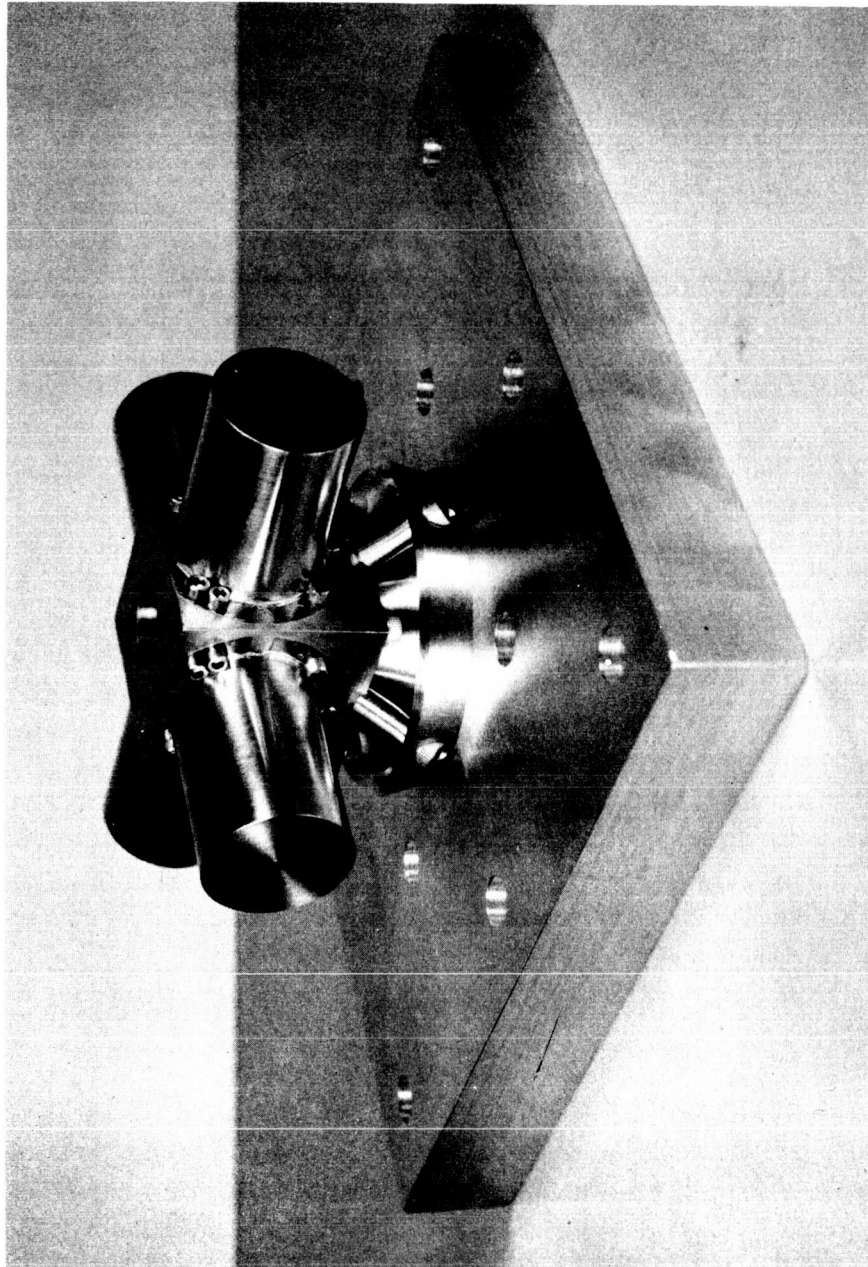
Simulated Generator Structure Mounted on the Test Fixture
